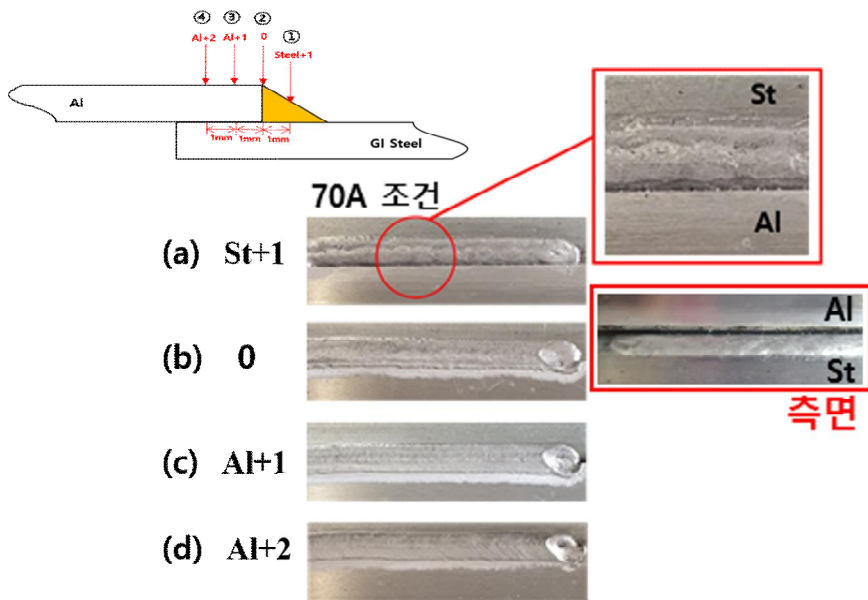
Bead appearance in welded joints for various wire positions
